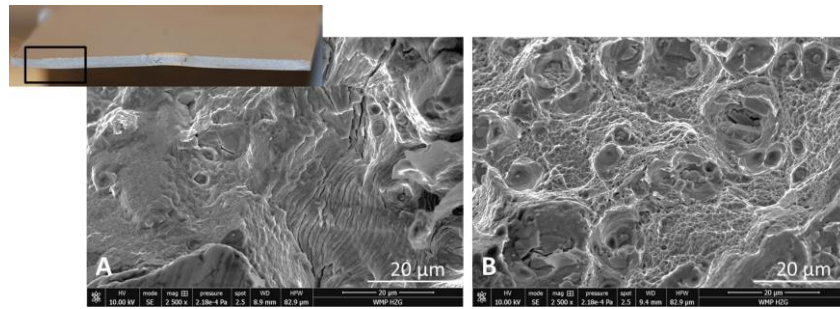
Fracture surface of the TS-Lower plate fracture mode close of the left edge A) Mixture of ductile dimples and fatigue striations; B) Closer to the edge only ductile dimples are observed.
